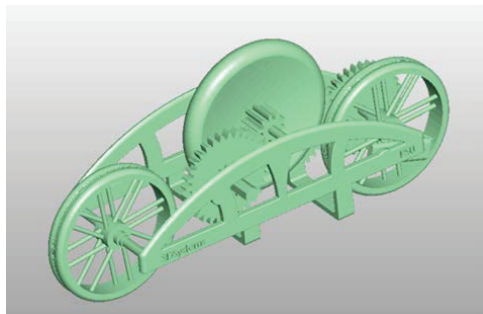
A flywheel motorcycle which includes slip fit wheel bearing surfaces and a gearing system with flywheel energy storage. The device is charged from a hex head fitting with the use of an electrical drill. (D. Birkes) [2]
